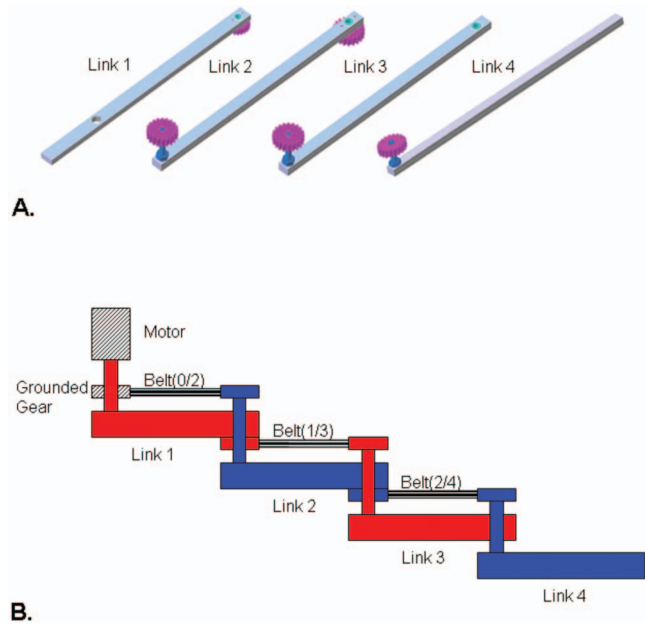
Drawings of the individual link subassemblies are shown (a). Link 1 has a keyed hole through which a drive shaft transmits torque from the motor; on the opposite end of Link 1, there is a pulley screwed onto it with a bushing in the center. A threaded pin on Link 2 passes through the bushing on Link 1 and rigidly connects a pulley to Link 2. On the opposite end of Link 2 is a pulley screwed onto it with a bushing in the center. A threaded pin on Link 3 passes through the bushing on Link 2 and rigidly connects a pulley to Link 3. Finally, on the opposite end of Link 3 there is a bushing through which a threaded pin on Link 4 passes and rigidly connects a pulley to Link 4. (b) An assembly view of the device is shown with belts spanning the pulleys driving the rotation of the links.
